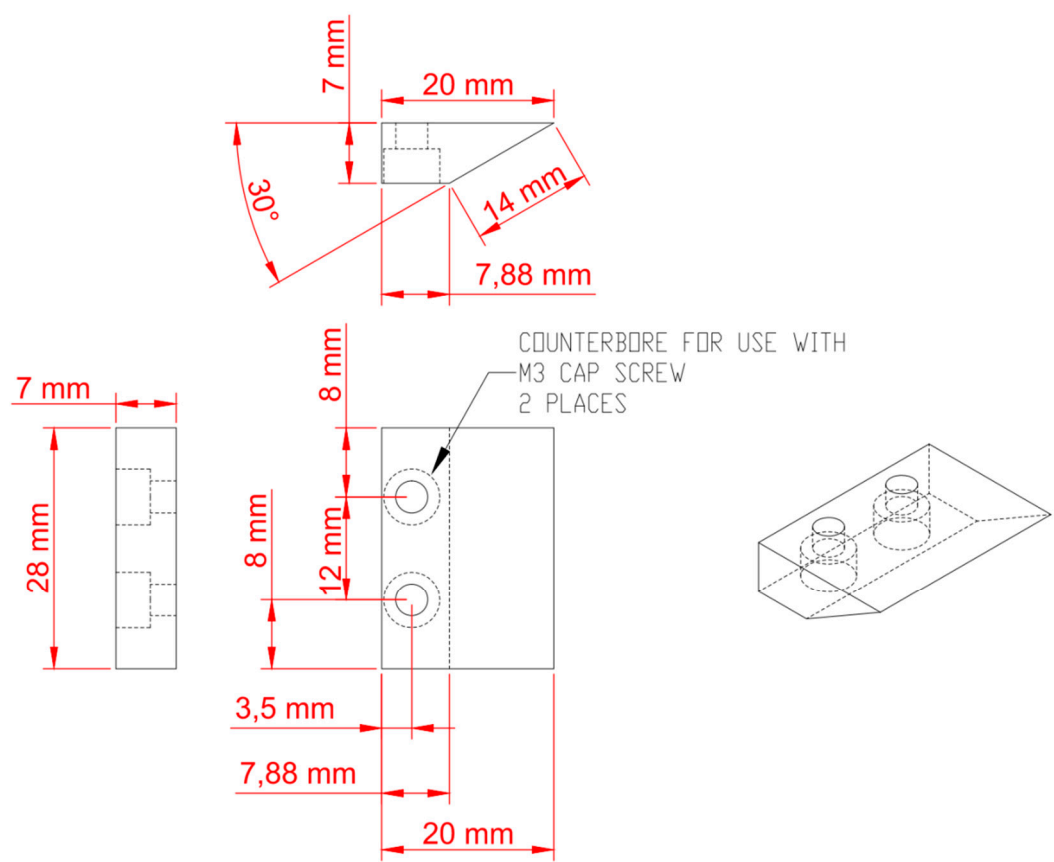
Detailed mechanical drawing of Part 5b from Figure S1.
